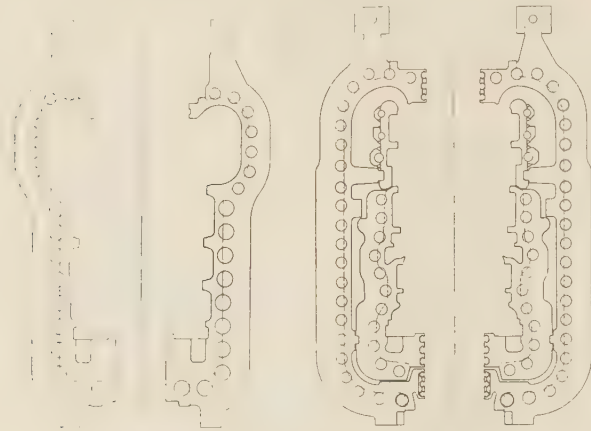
COMPARABLE BOLTING FLANGE OF SINGLE- AND DOUBLE-SHELL TURBINES
